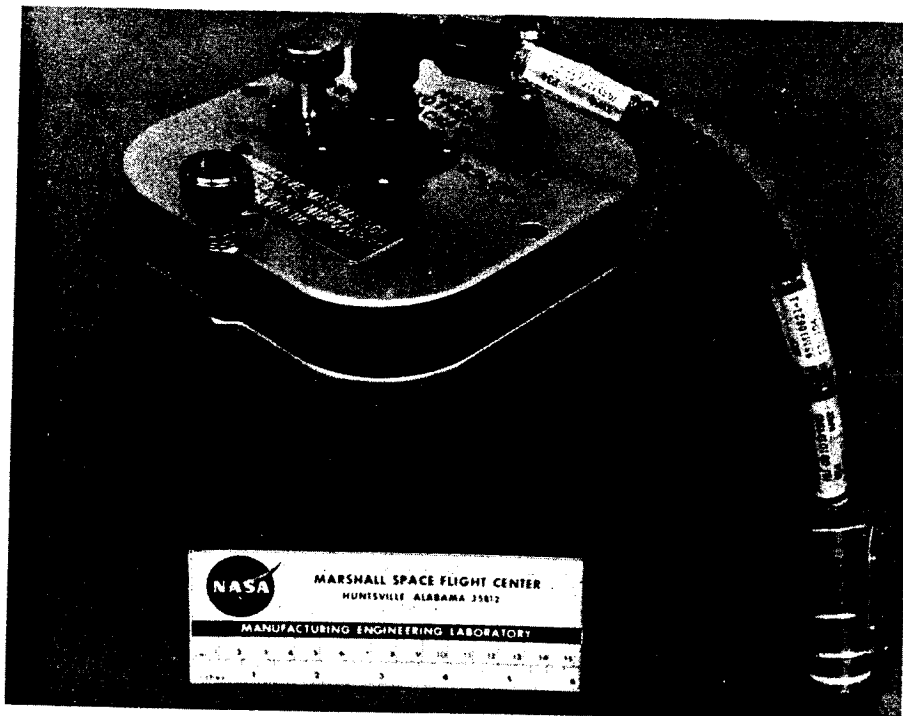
M552 EXOTHERMIC PACKAGE AND ELECTRICAL POWER CABLE
